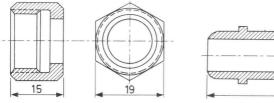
Cap nut type TE 1051b (thread 3/8 in gas).
